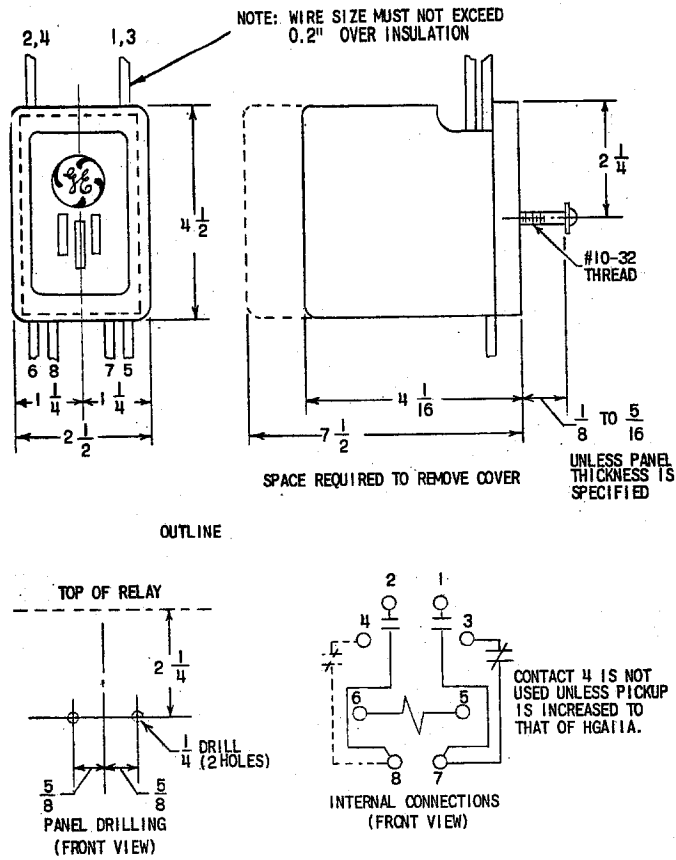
(6375628-5) Outline and Panel Drilling for Surface Mounting of HGA17D and HGA17E Relays.
